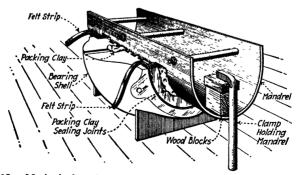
Method of setting up a large bearing cap prior to pouring of the babbitt.
